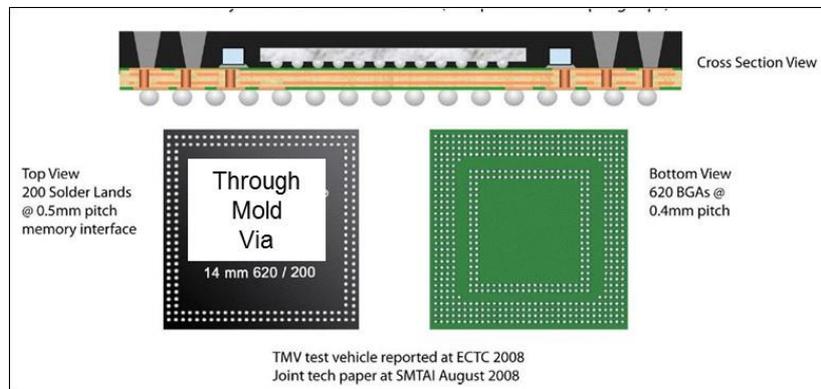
Cross-section top and bottom view of a new TMV™ PoP package [19].
